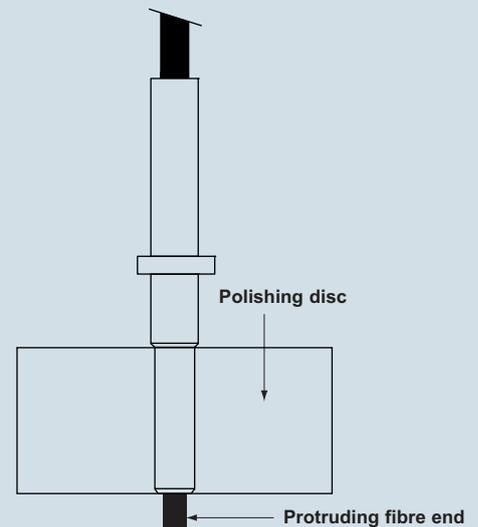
Polishing Disc with Guide for Connector Sleeve
